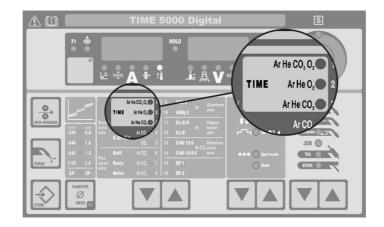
The TIME 5000 Digital welding system is suitable for both high-performance and standard welding processes.
